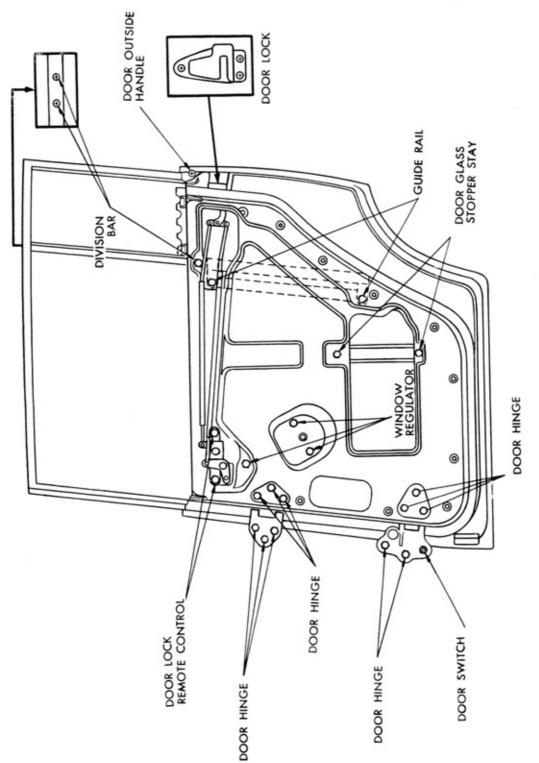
Mounting Bolts Locations (Rear Door)
